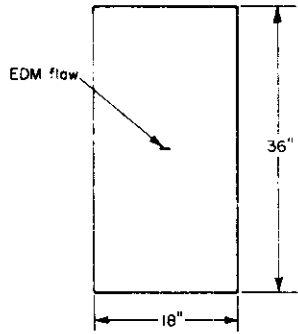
SHEET FRACTURE TOUGHNESS SPECIMEN
